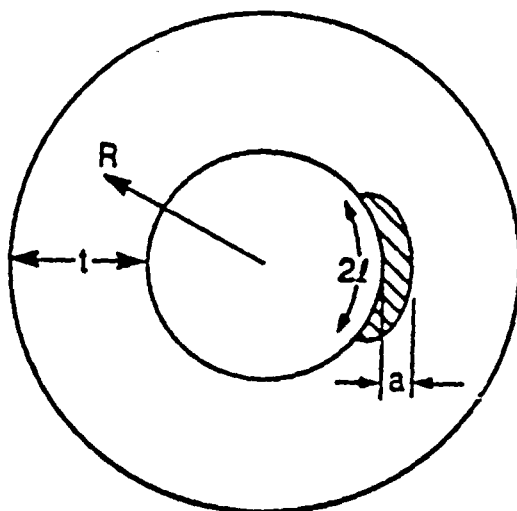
Schematic of a Part-Through, Circumferential Surface Flaw in a Cylinder - Constant Depth Flaw
